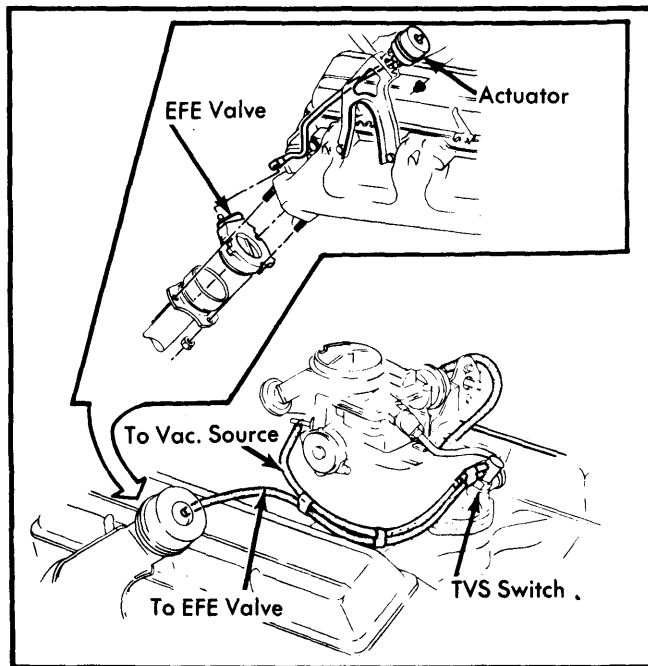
Typical Early Fuel Evap. System Component Locations (Chevrolet V8 Shown)
